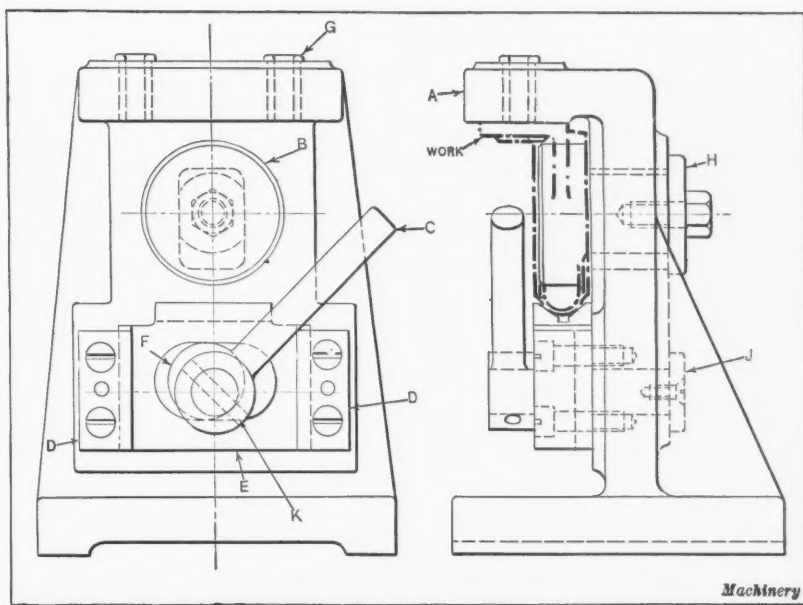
Drill Jig used in drilling Holes in Base of Fan Bracket
